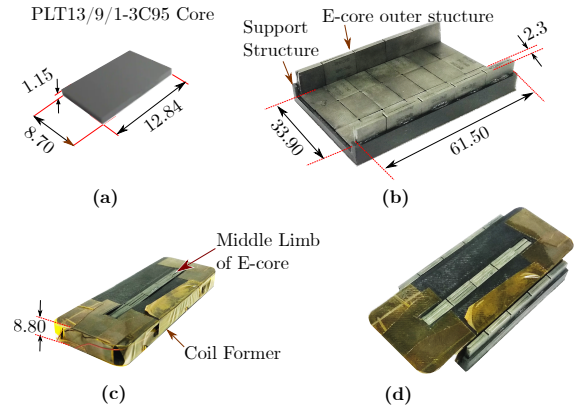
Actual assembly of OFC-WPT:: (a): I-core, (b): Outer structure of E-core glued on a 3D printed support structure, (c): Winding wound on a 3D printed coil former and middle limb of E-core inserted in the slot, (d): Coil shown in (c) is inserted in the E-structure shown in (b). Finally pole shoes are glued to the bottom of coil former to complete the assembly. (All dimensions are in mm)
